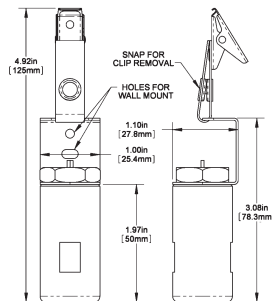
1" Hanging Bracket Thermbuffer (Transmitter is ordered and mounted separately.)
